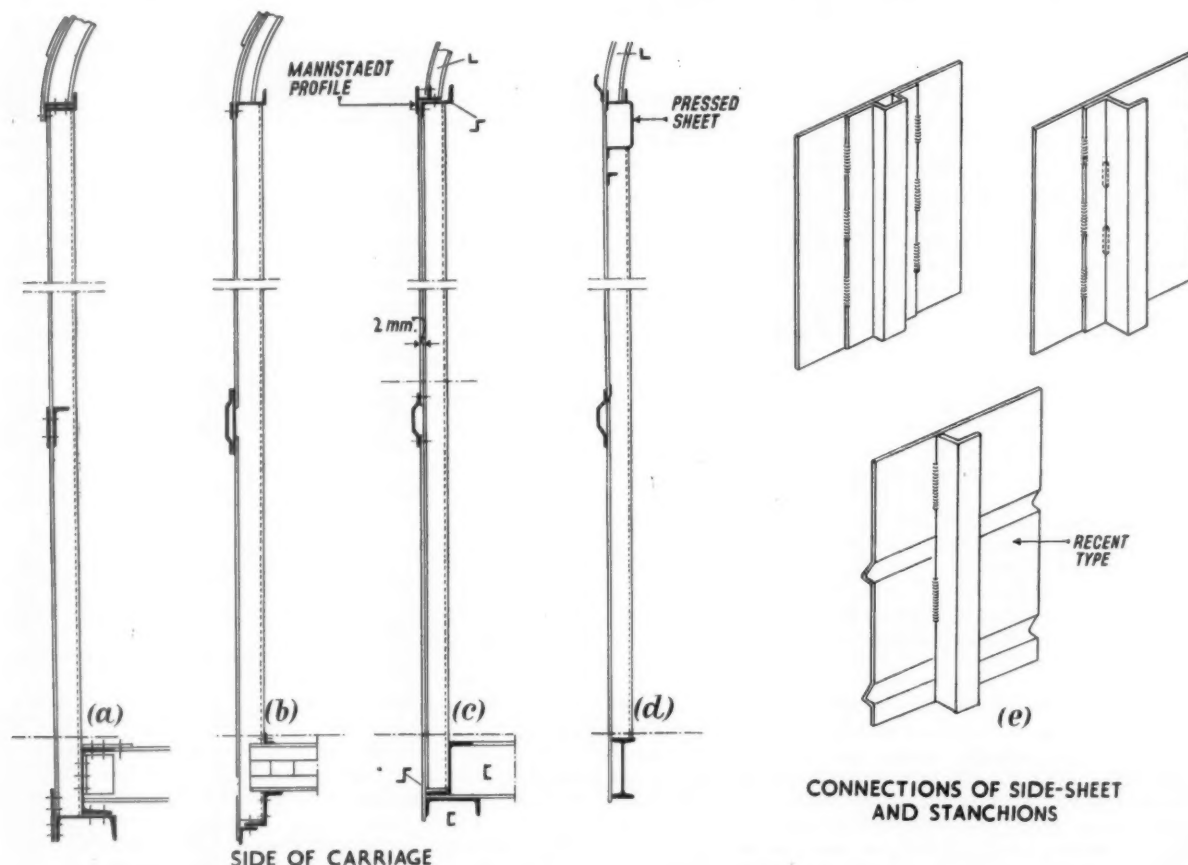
Development of welded construction for the pillars, cantrails and side panels of coaching stock.
